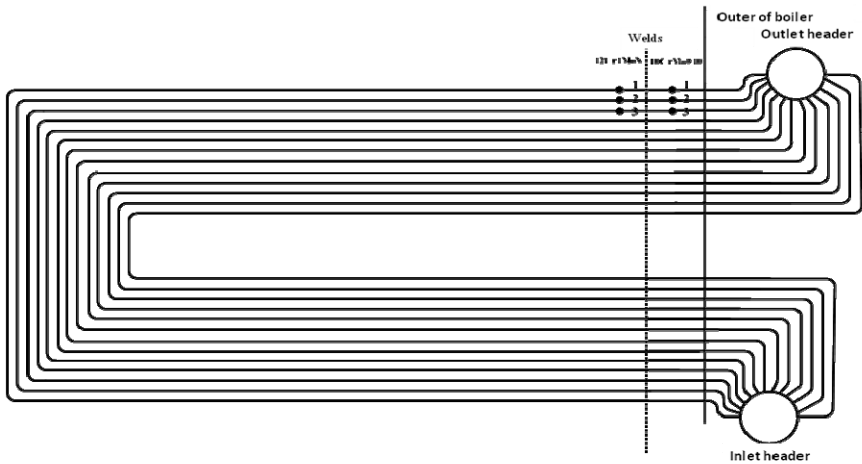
Schematic Diagram for Measuring Parts of Tube Row
